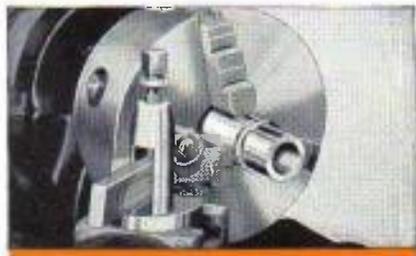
Making a Bushing, Complete without Removing from the Chuck.
